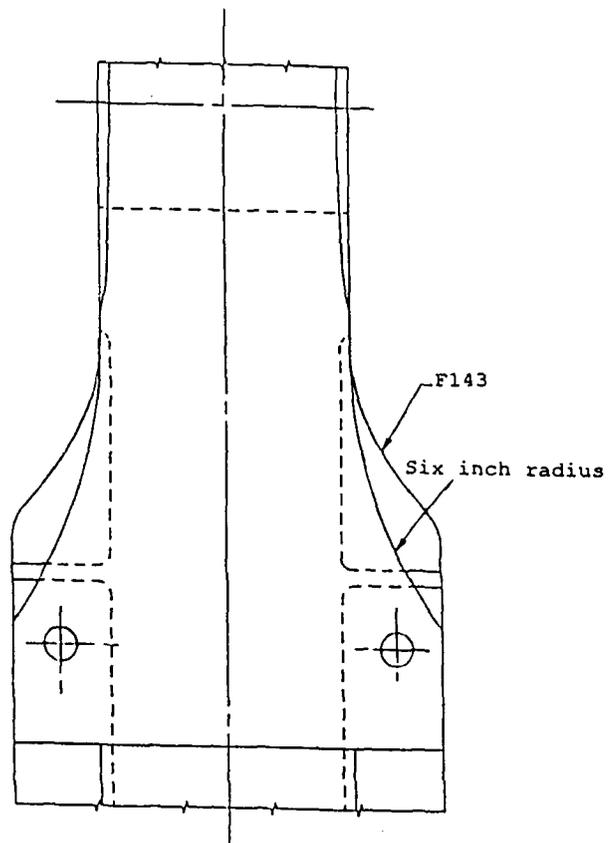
F/A-18 BULKHEAD FILLET PROFILES
